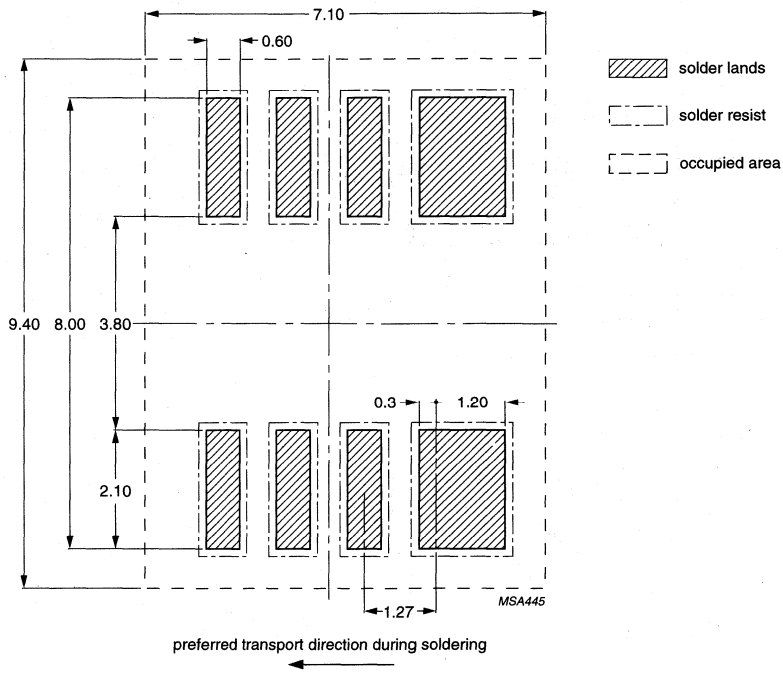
Wave soldering footprint for SOT343; typical dimensions.
